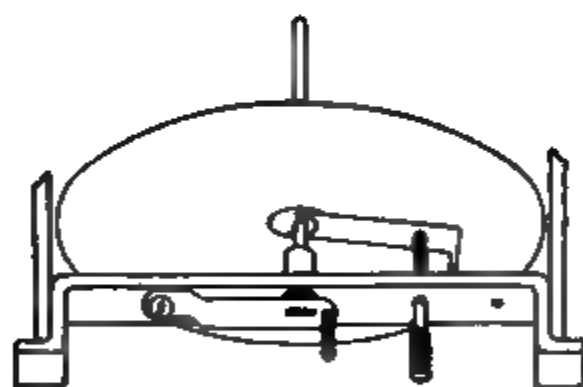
Method of Supporting Bearing and Locking Moving Element.
